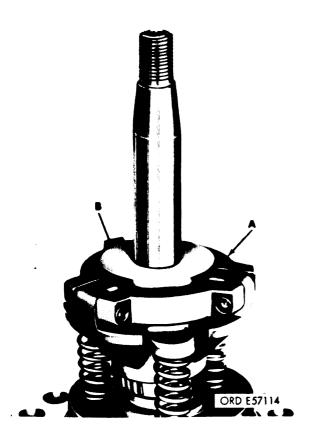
Installing spider assembly, spacer, and thrust plate.
